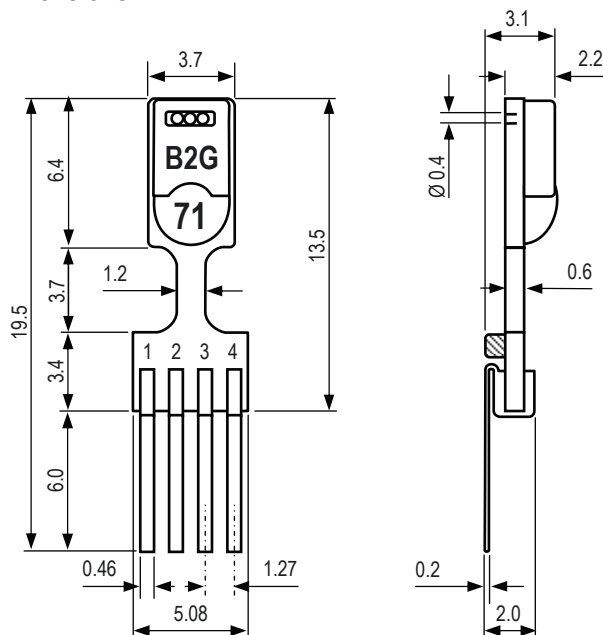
Drawing of SHT7x (applies to SHT71 and SHT75) sensor packaging, dimensions in mm (1mm = 0.039inch). Contact assignment: 1: SCK, 2: VDD, 3: GND, 4: DATA. Hatched item on backside of PCB is a 100nF capacitor – see Section 2.1 for more information.
